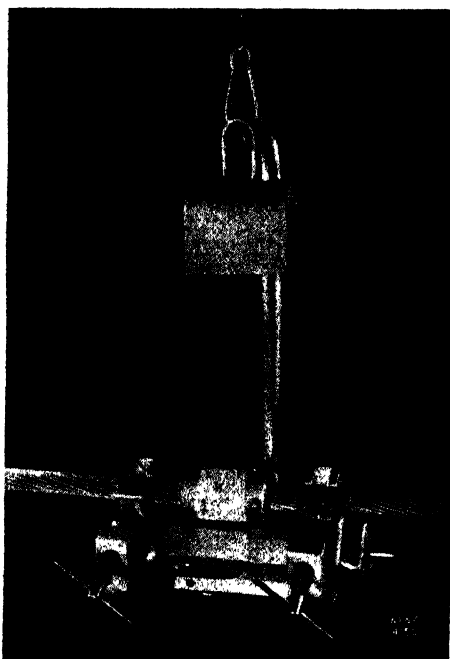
Tension clamp for alumino-thermic cable welding, "Alutherm".
